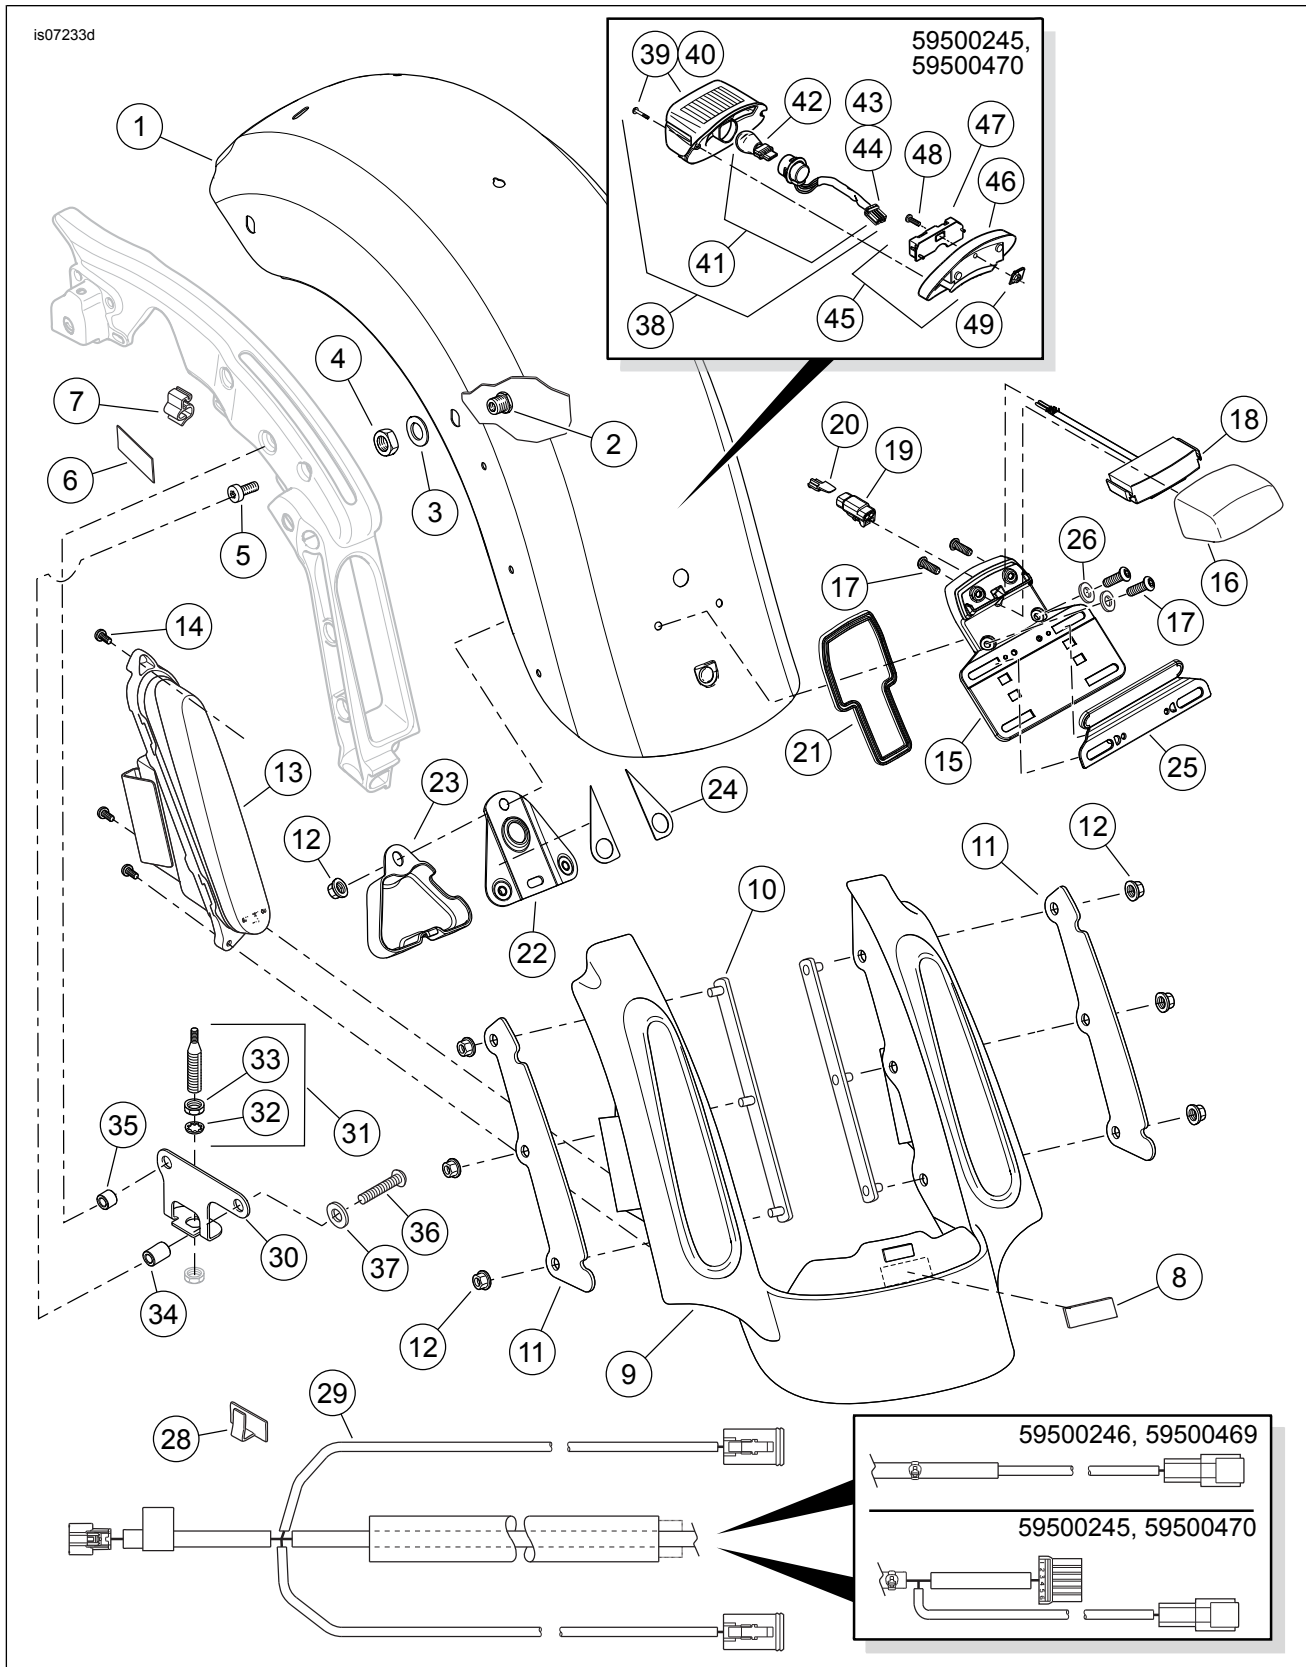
Service Parts, FL Touring CVO-Style Rear Fender Kits
